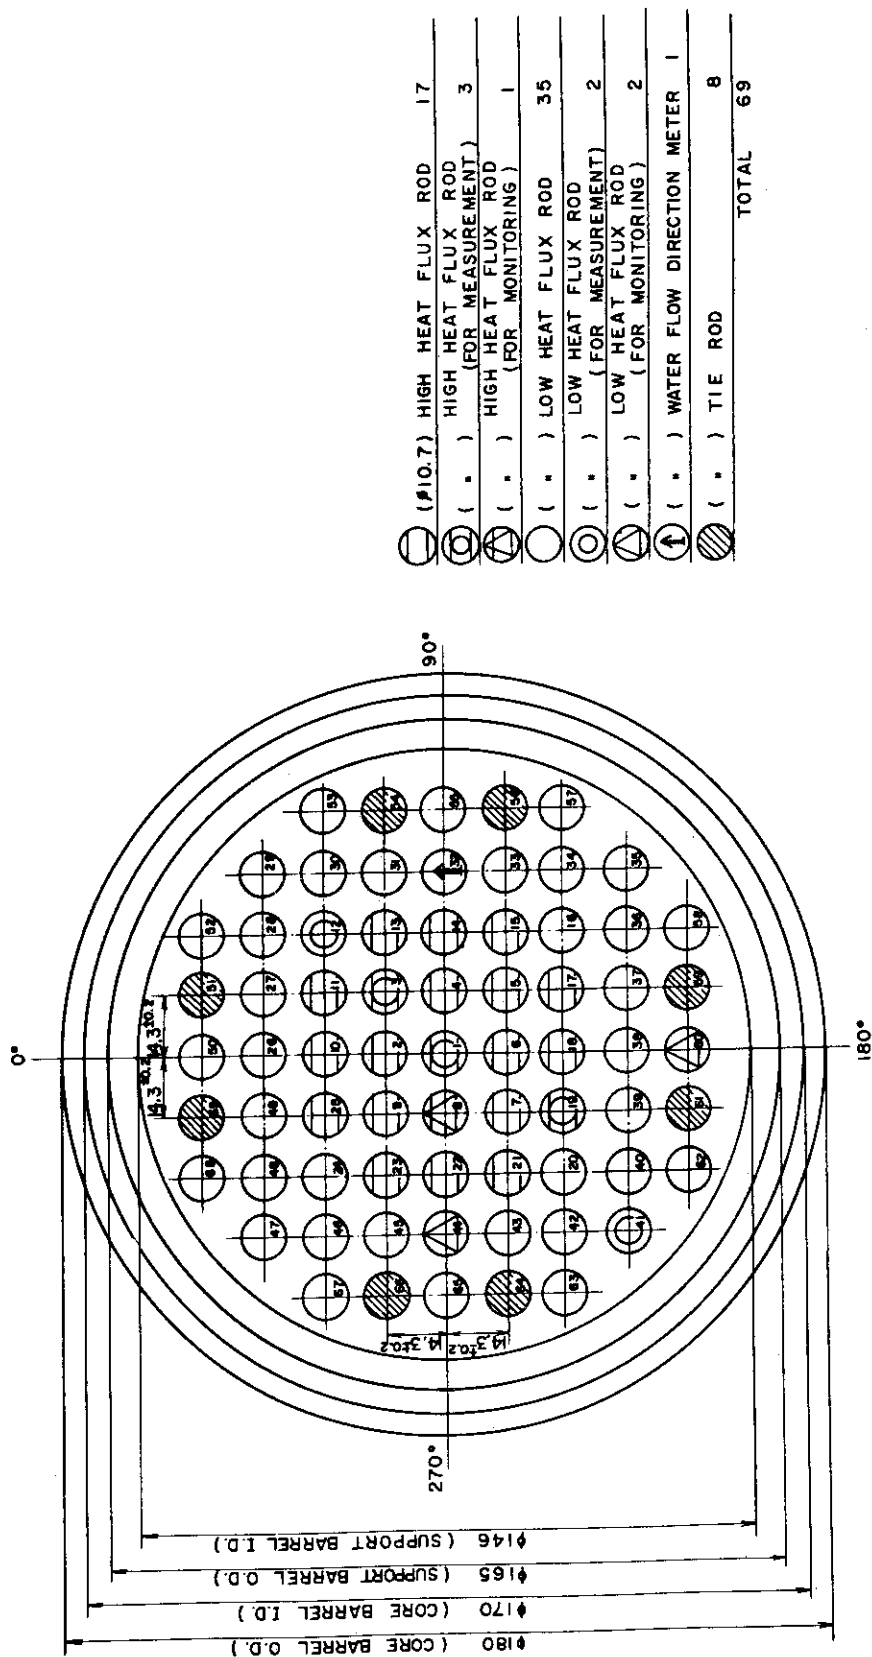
b Arrangement of Simulated Fuel Rods in No.3-A Assembly
